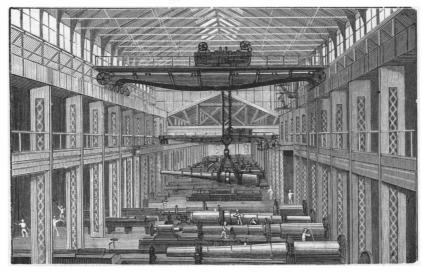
INTERIOR OF GUN SHOP AND MAMMOTH TRAVELING CRANE.
